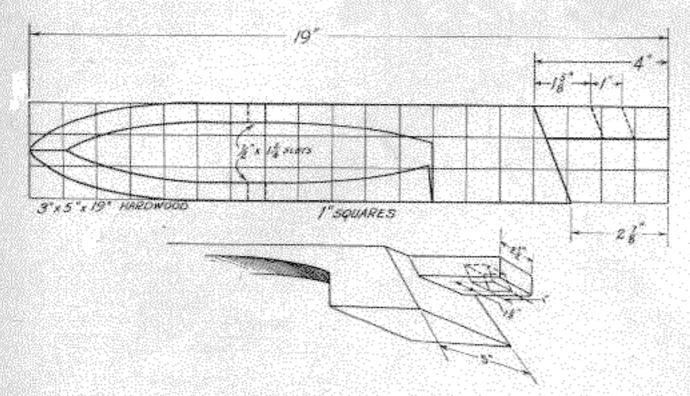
Layout of vice. Use care to get the full-size layout accurate.
